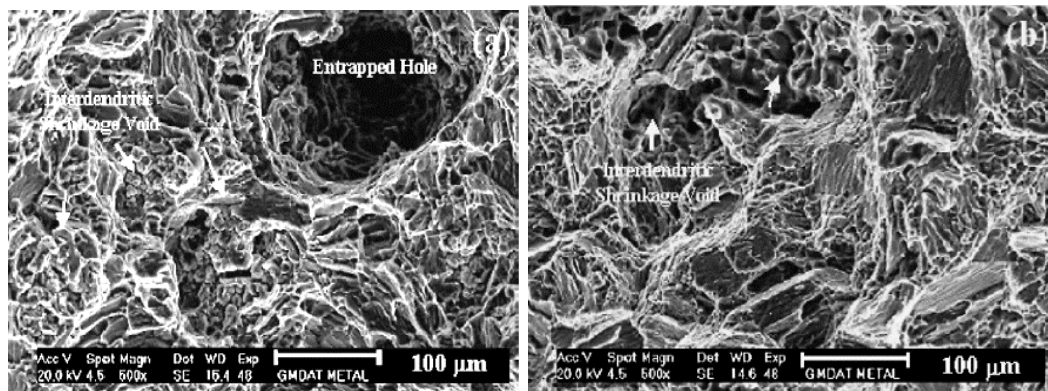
Fracture surface of (a) die-cast and (b) gravity cast AZ91 alloy [122]
